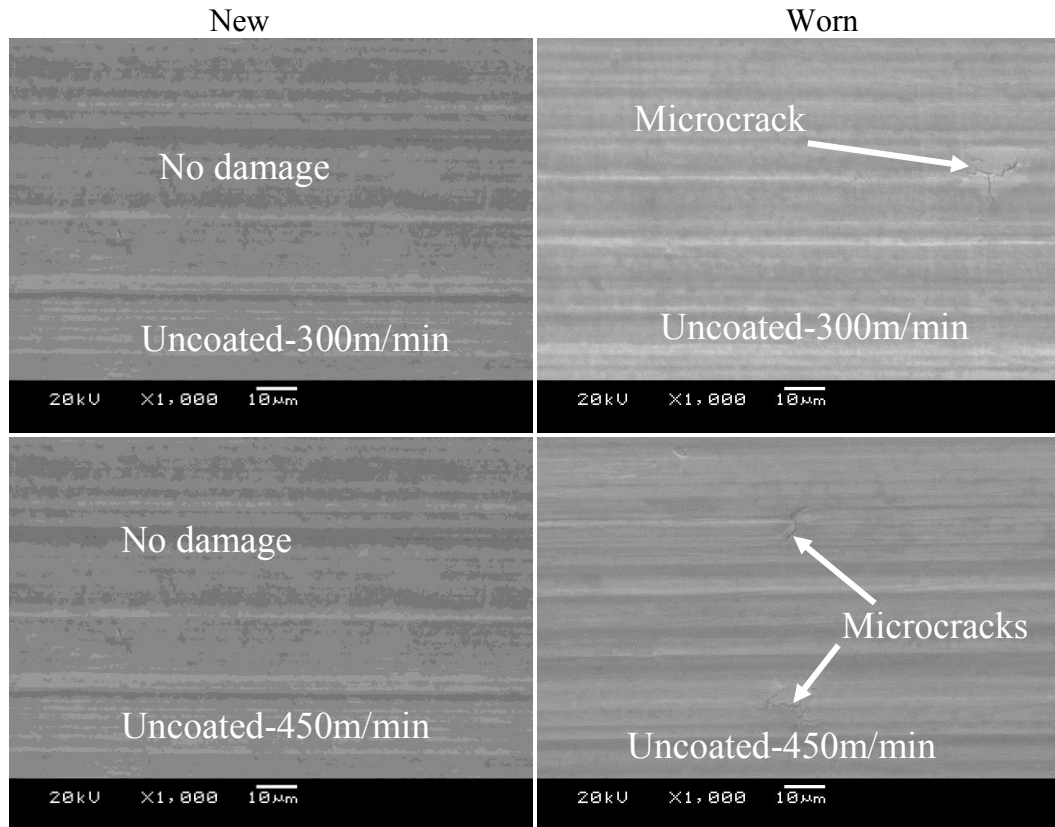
Higher magnification SEM micrographs of workpiece surfaces following machining with new and worn uncoated PCBN inserts
